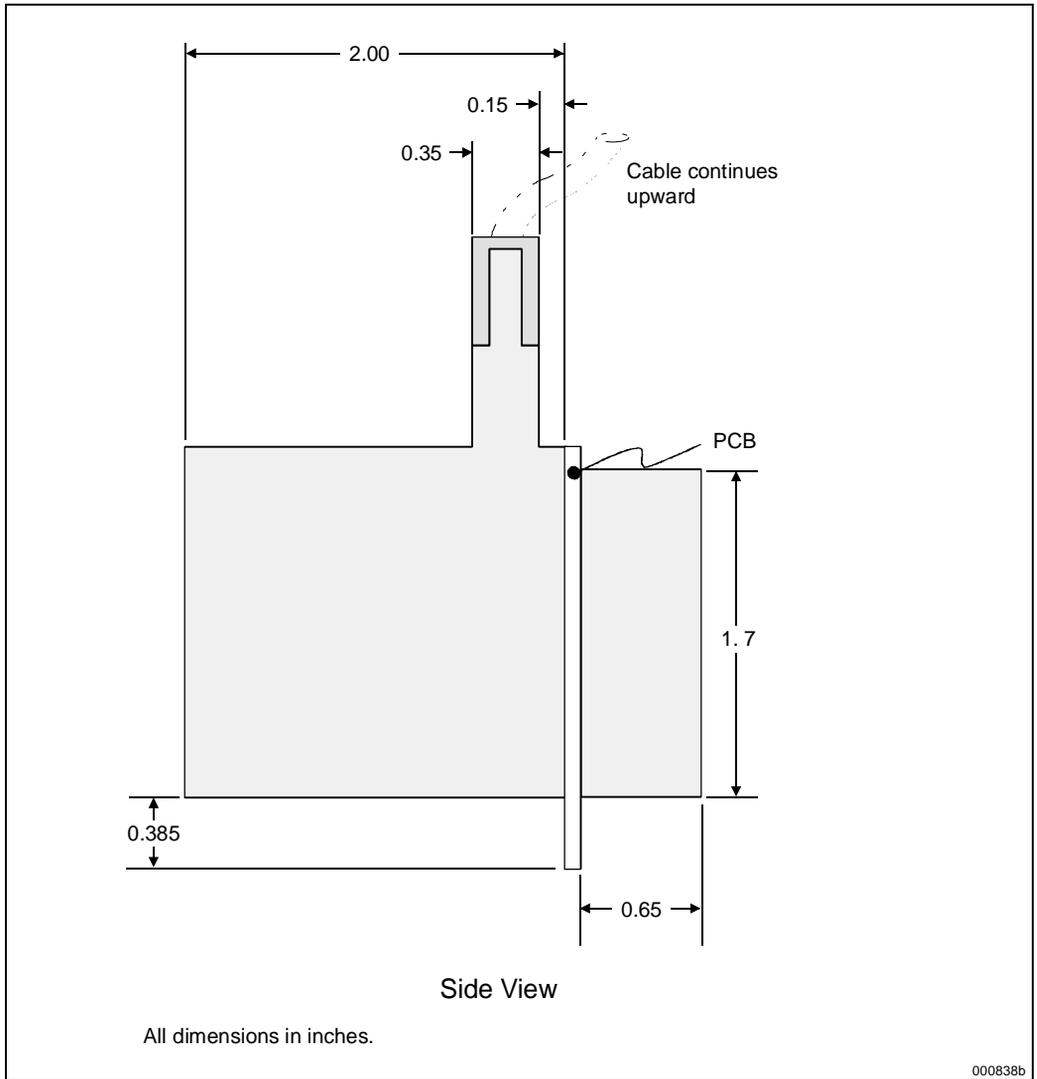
Pentium® II Processor Integration Tool Mechanical Keep Out Volume—Side View
